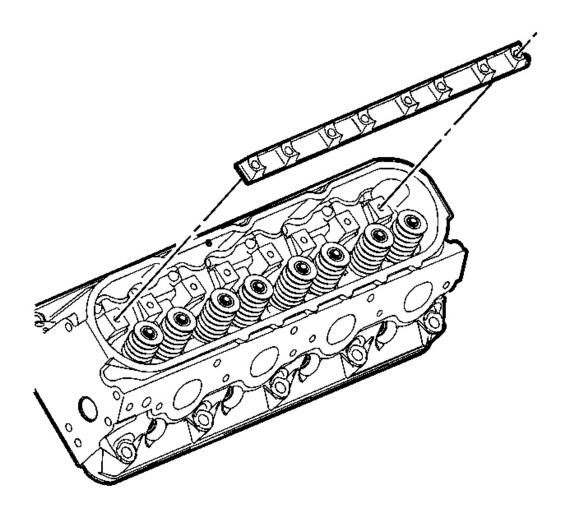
View Of Valve Rocker Arm Pivot Support Courtesy of GENERAL MOTORS CORP.
